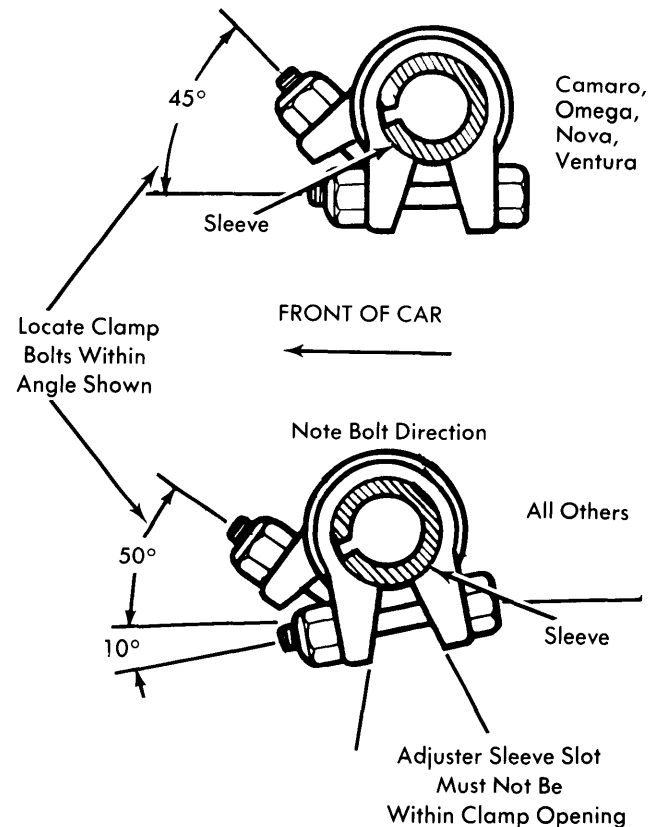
Tie Rod Clamp Positioning (General Motors) (Exc. "H" Series, Eldorado & Toronado)
